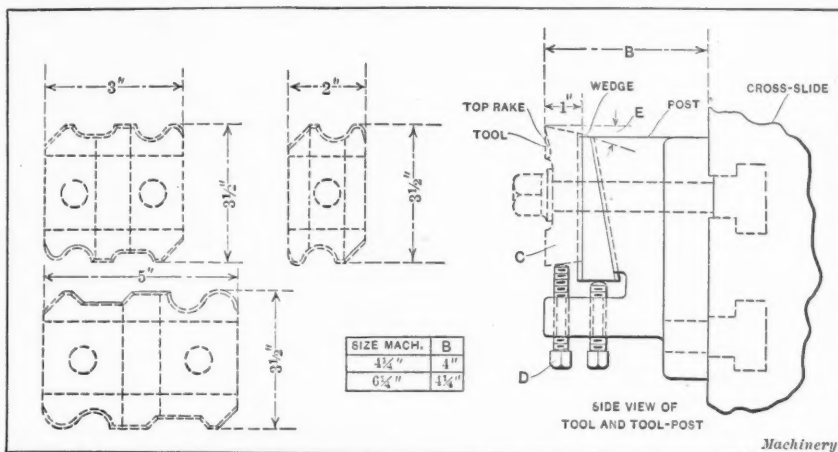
Diagram illustrating Tool-holders for holding Large Flat Forming Tools and Proportions of Large Flat Forming Tools
